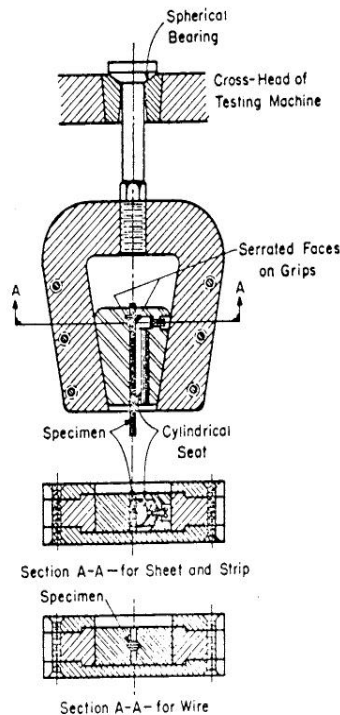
Gripping Devices for Sheet and Wire Specimens
